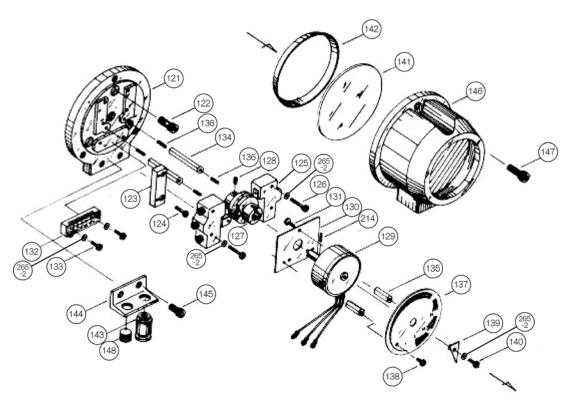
Exploded View of the Unloader Indicator (Traditional standard type)
